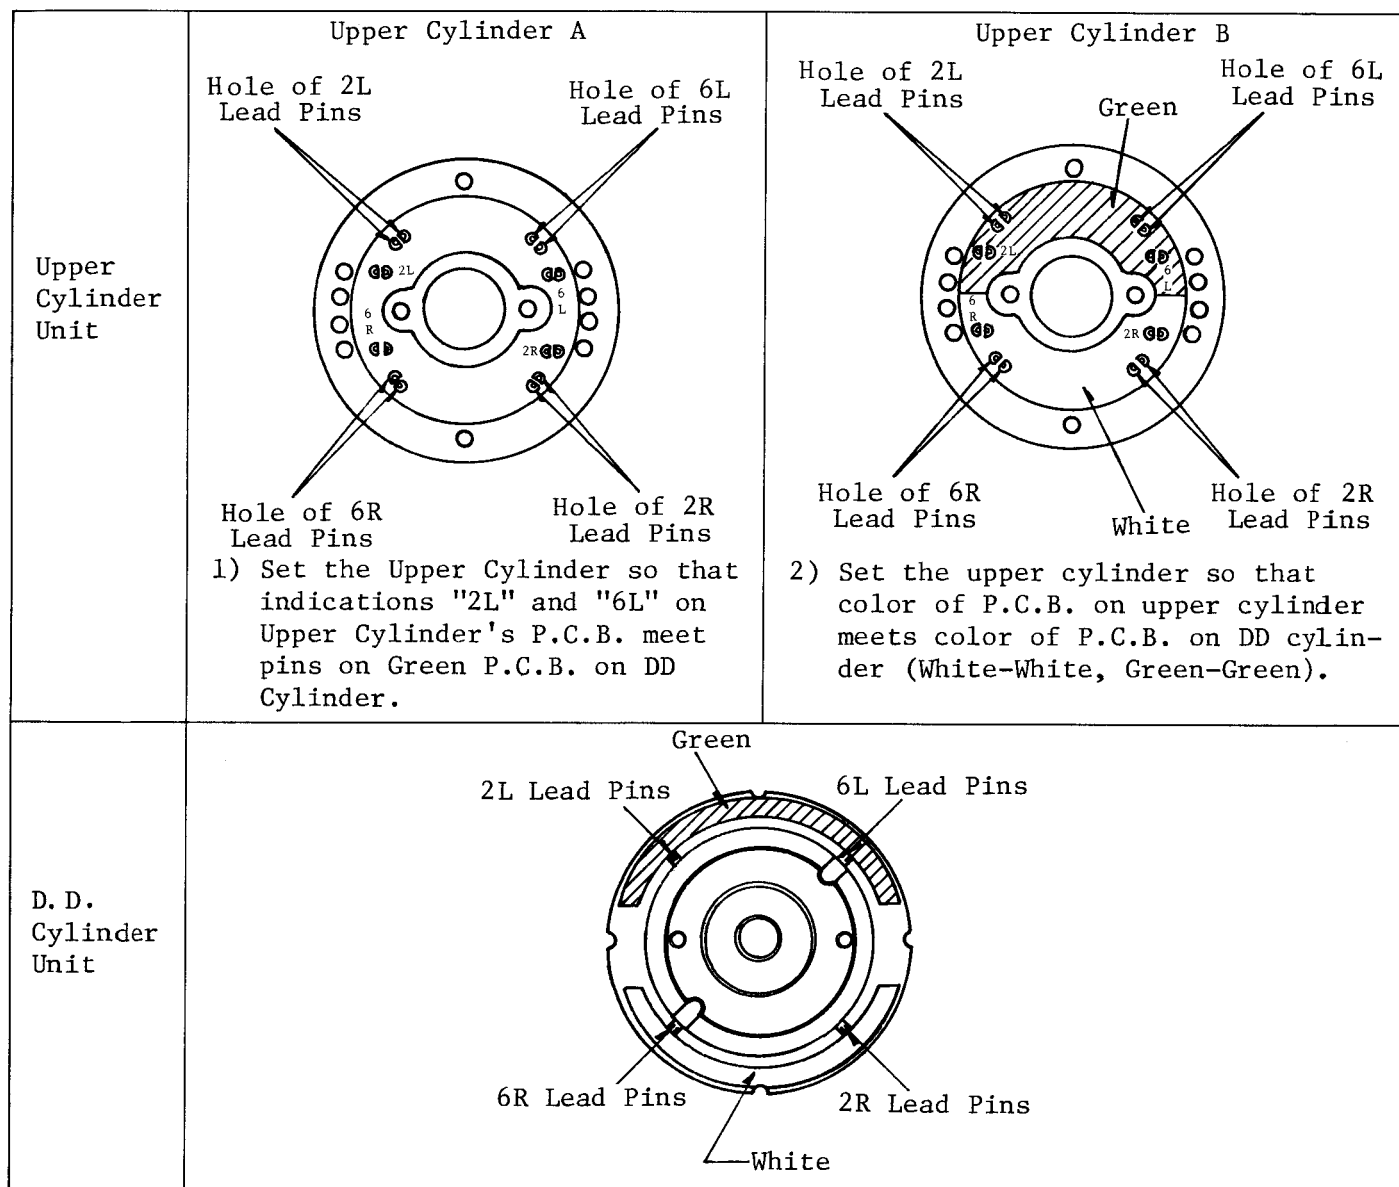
Replacement of Upper Cylinder Unit-(3)
